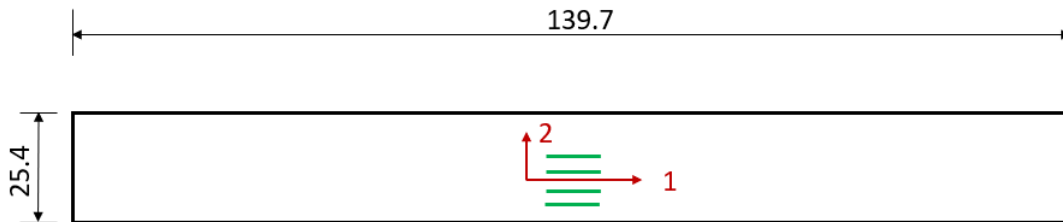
Typical compression specimen geometry and layout (dimensions in mm).
